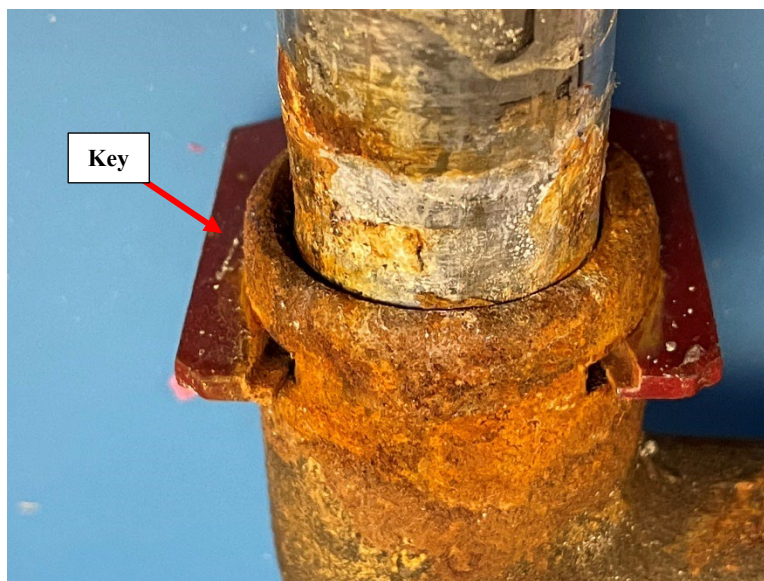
Tubing marked for removal (15092 CBS 2-015).
